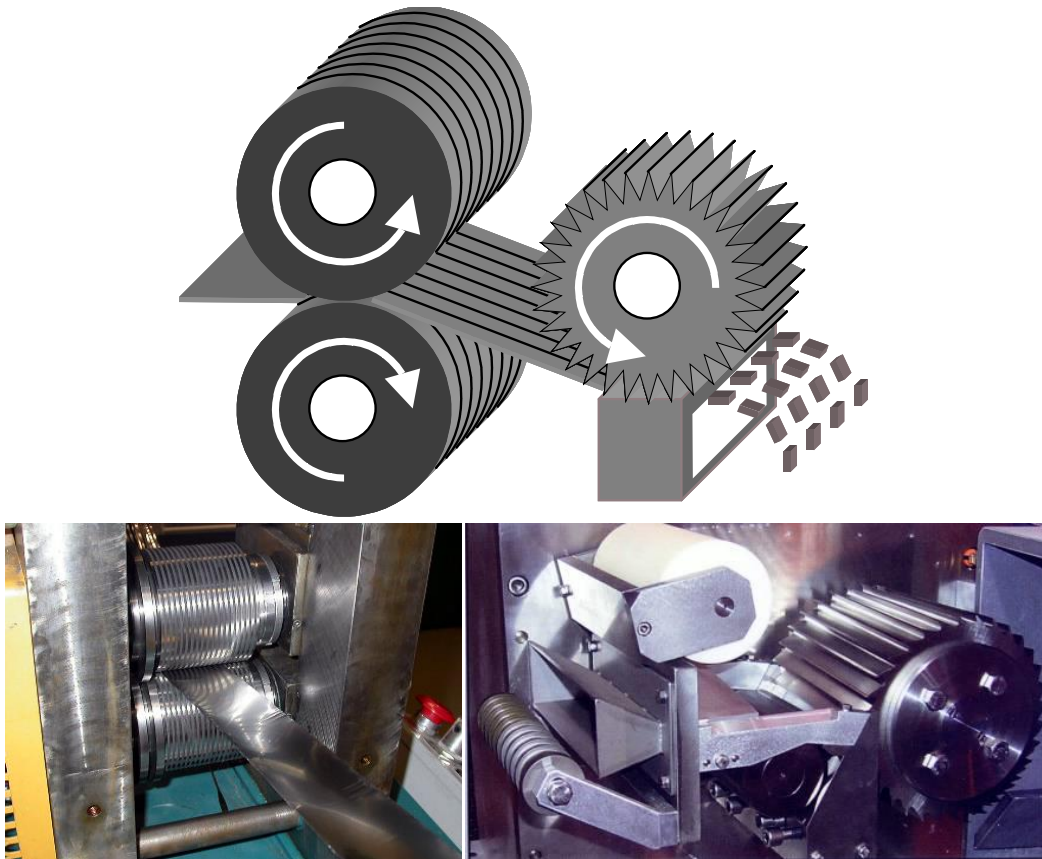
Top: Sketch of the cutting principle adopted to cut the ribbons into lamellar particles, Bottom, pictures of the real slit and cutter assembly.
